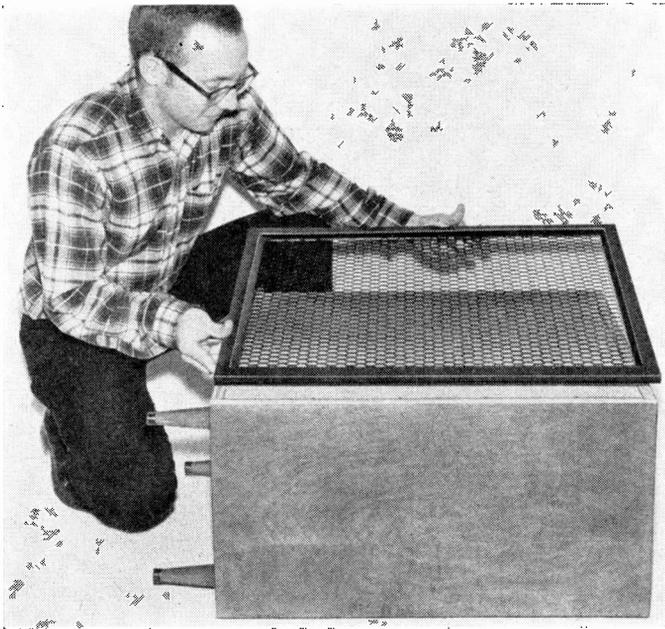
After enclosure is assembled, attach furniture legs to bottom and install speaker as shown.
